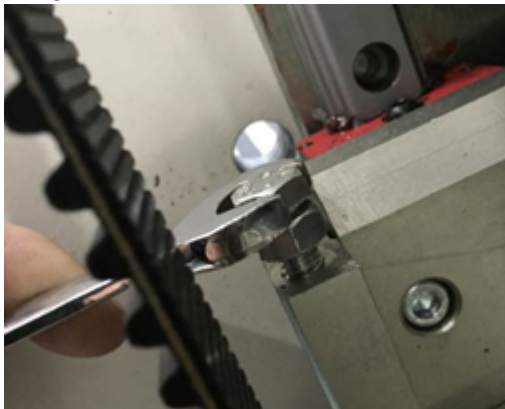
Example of a technician adjusting the jacking screw.
